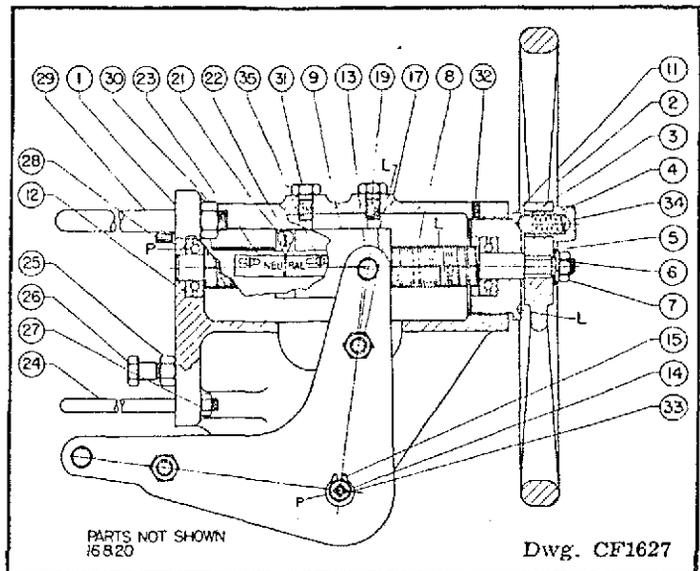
Type MO side mounted handwheel for Sizes 45, 50 and 60 Type 667 actuators.
